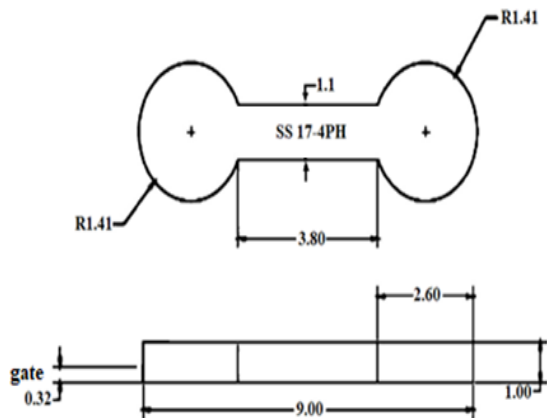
Dimensions of the 17-4PH stainless steel micro-sized component (mm)
